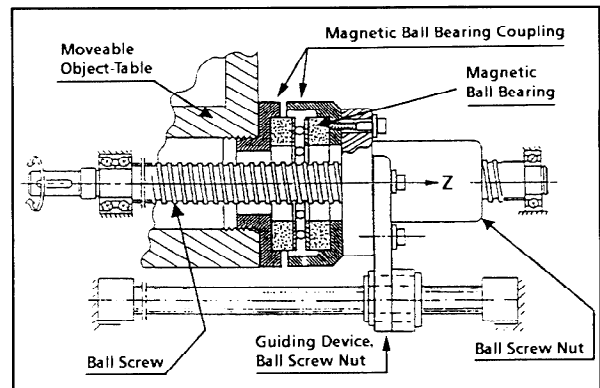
Ball Screw Translator with Magnetic Ball Bearing Coupling [9, 10]
